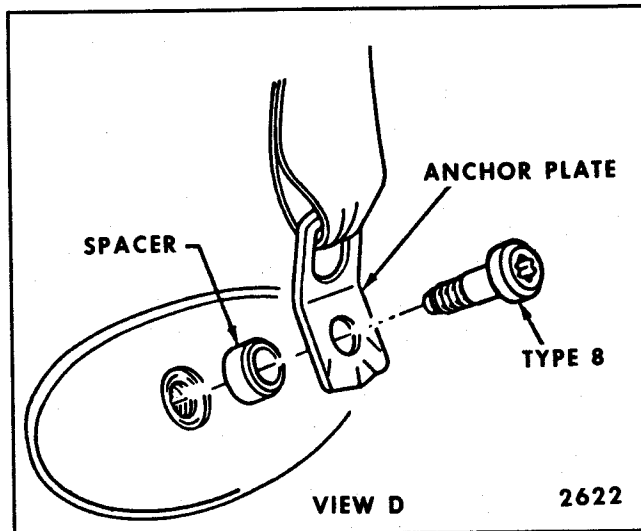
Shoulder Belt to Front Seat Attachment
